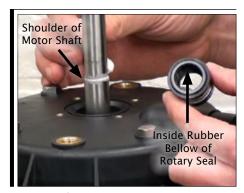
| Apply seal lubricant around the shoulder of the motor shaft, and inside rubber bellow of the rotary portion of the seal
